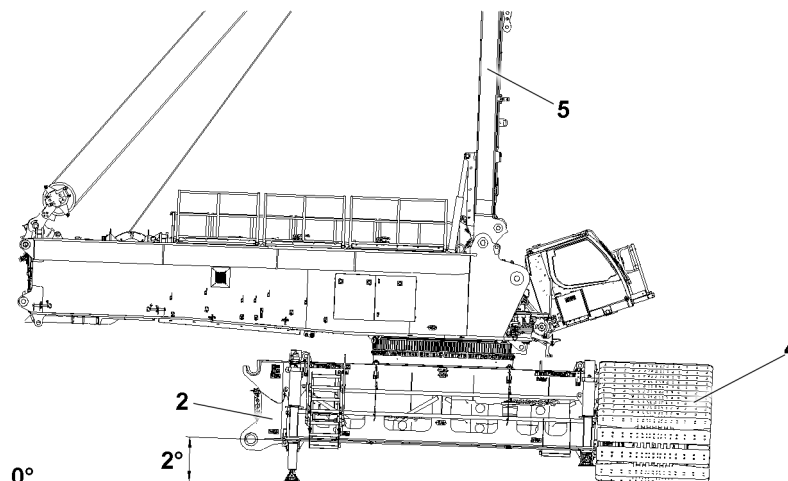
Assembling the second crawler carrier with the auxiliary crane
